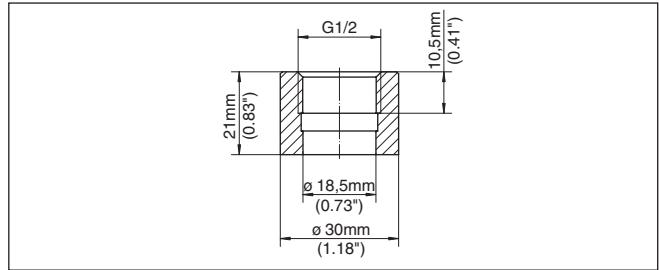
Dimensions welded socket G $\frac{1}{2}$  (ISO 228-1), front-flush - VEGABAR 82
